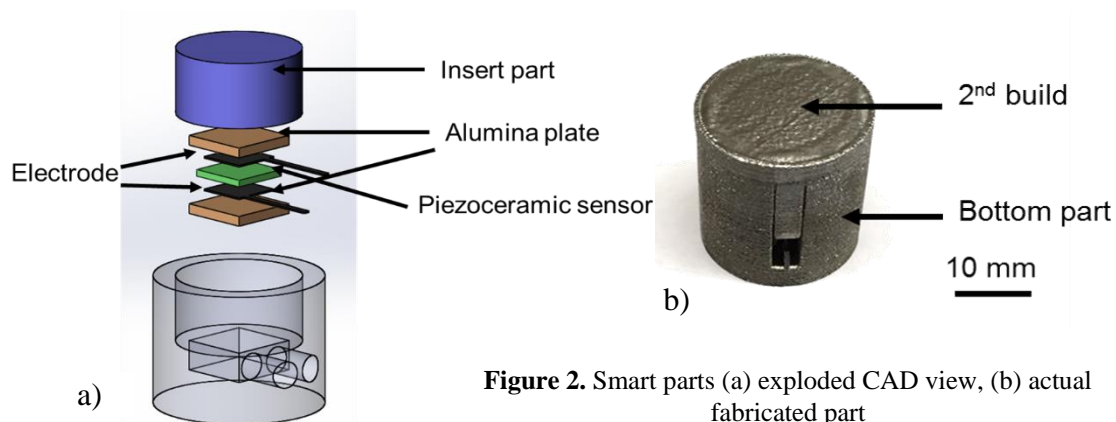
Smart parts (a) exploded CAD view, (b) actual fabricated part
